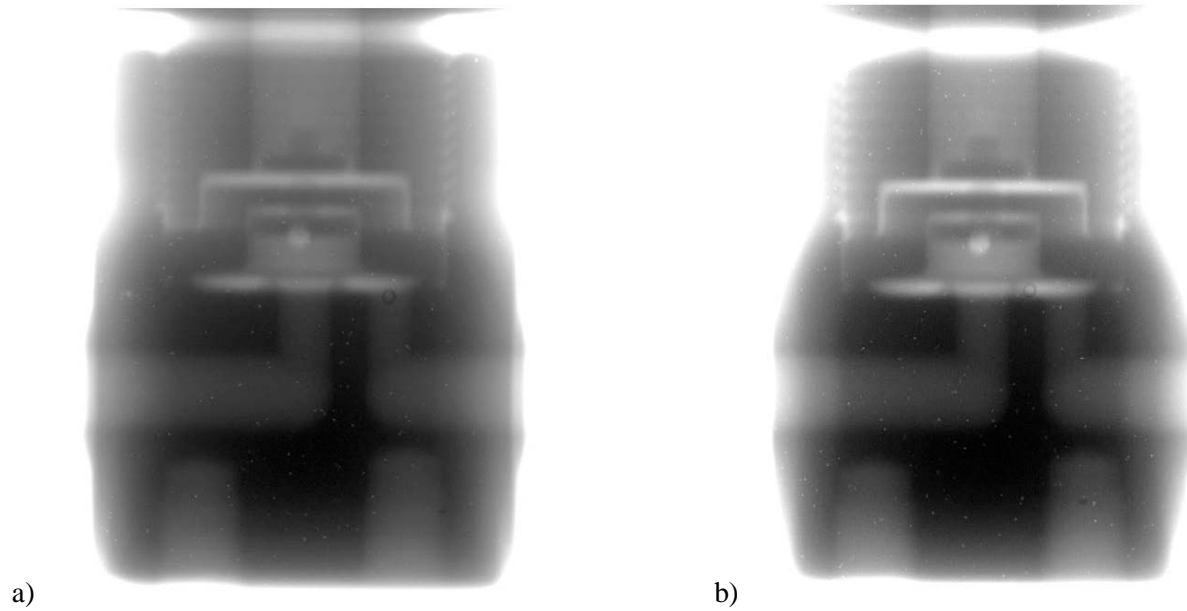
Radiographs of a) “As-Received” Valve and b) Pressure Tested Valve
